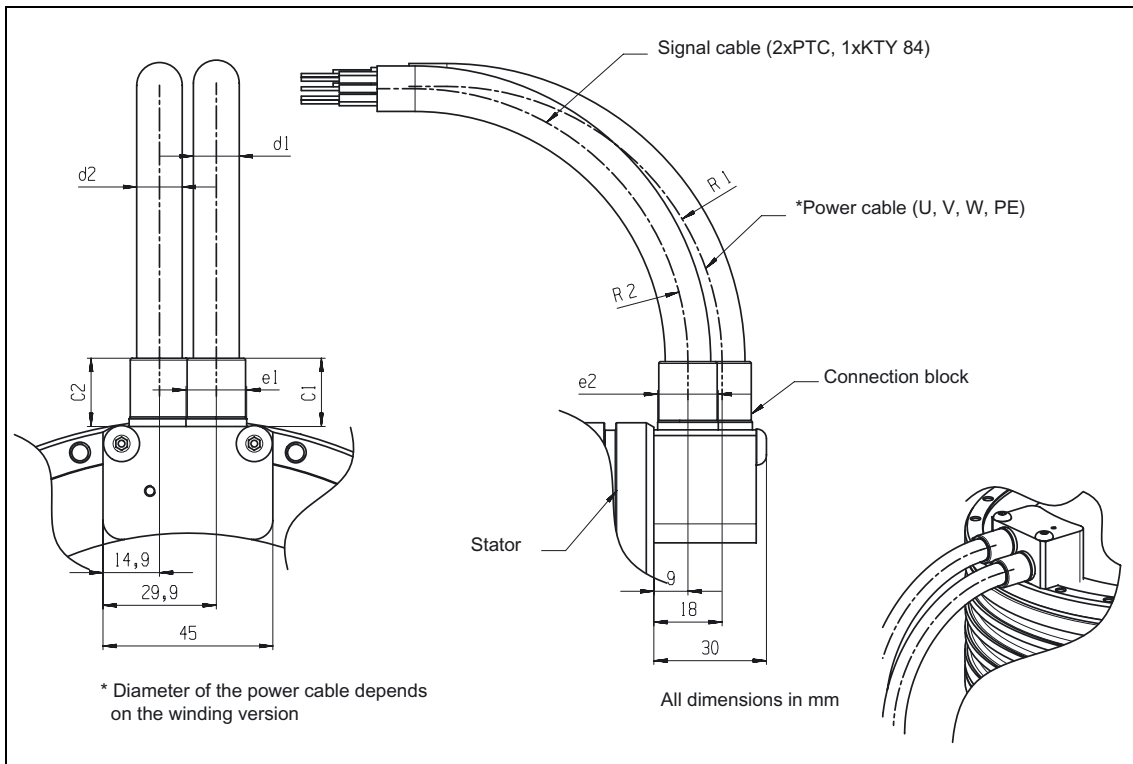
Radial electrical connection with sleeve for 1FW6090 (motor type B)
